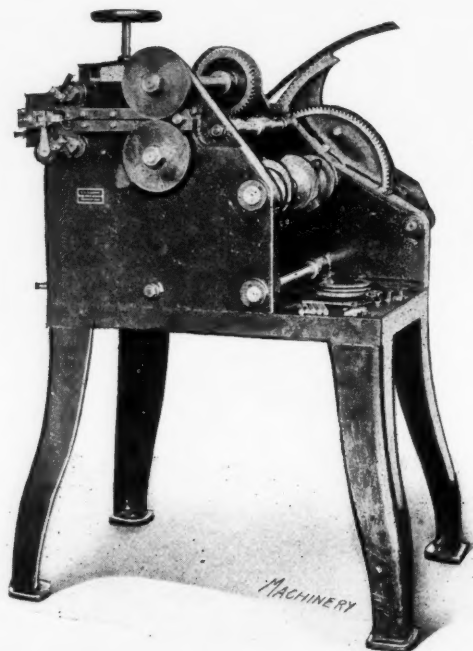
Feed Mechanism of Spring Coiler shown in Detail in Fig. 1
